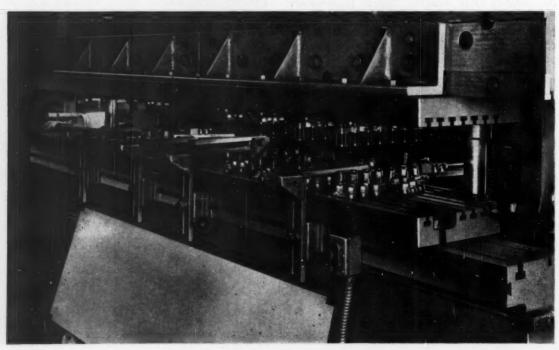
For light-duty punching operations such as are required in the production of corn crib sheets, extensions on the press brake ram and bed can be made quite wide.
